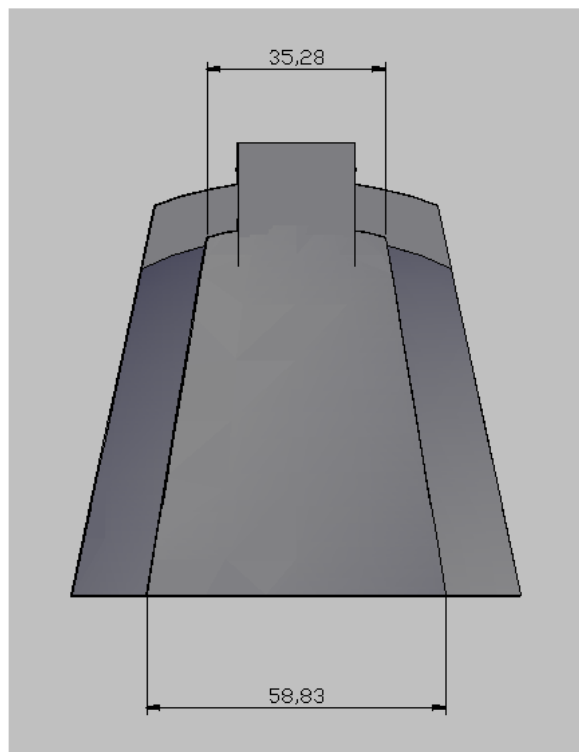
Back view dimensions of the centre part of the safety helmet
